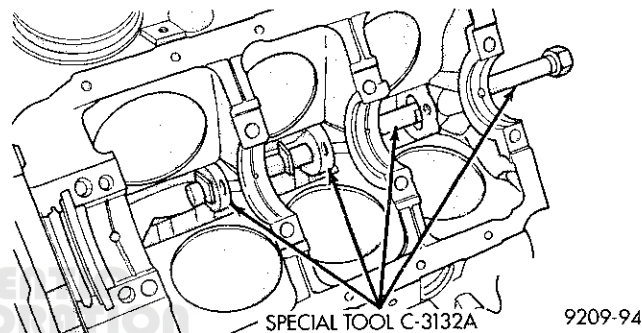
Camshaft Bearings Removal and Installation with Tool C-3132-A
